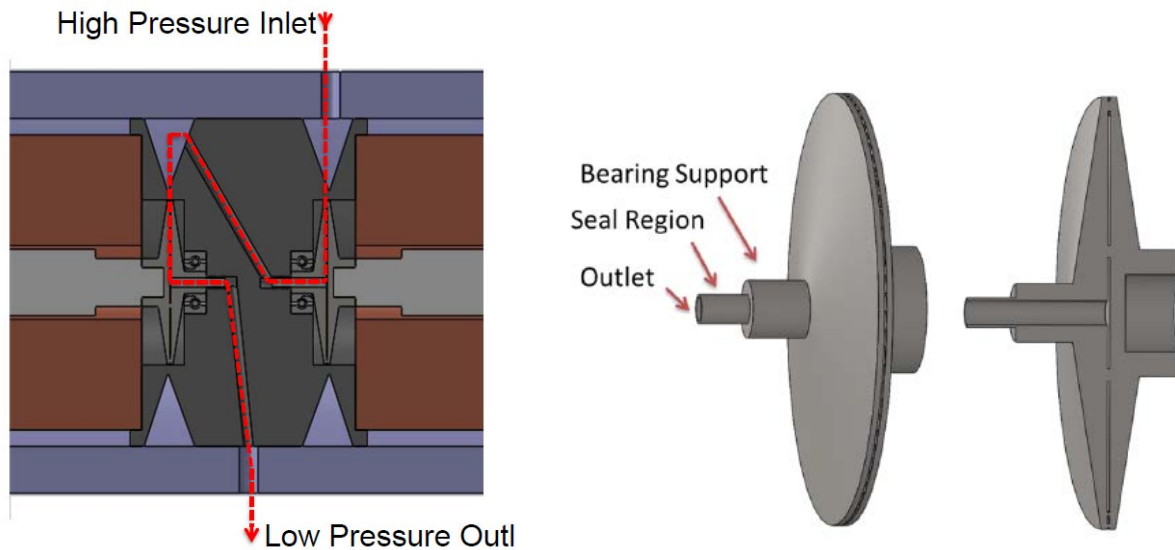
Two-stage design flow path (left). Preliminary impeller design and cross-sectional view (right).
